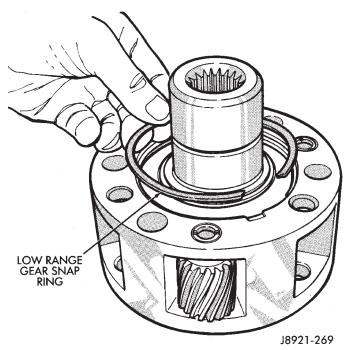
Low Range Gear Snap-Ring Removal/ Installation
